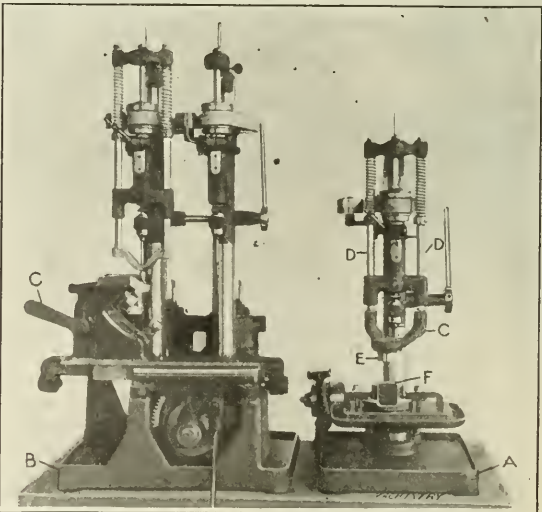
Single-spindle and Gang Drills used for Straight and Angular Work on Fuse Body (Work removed)
